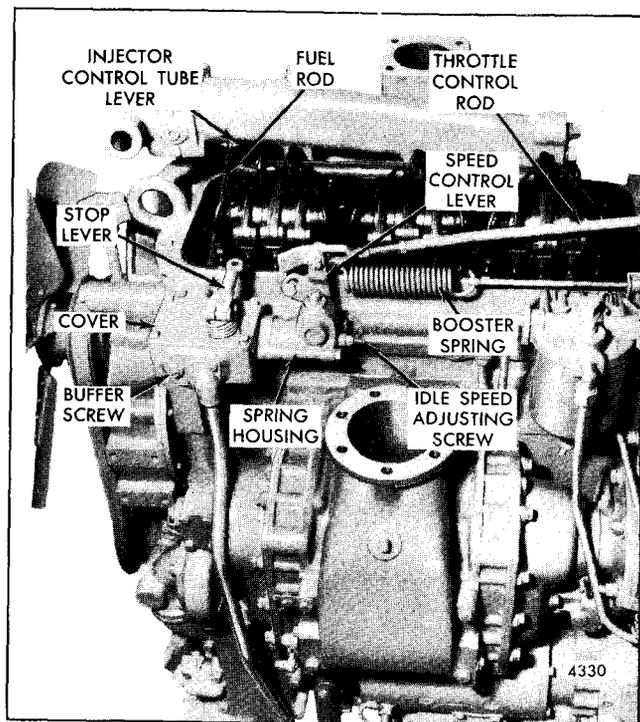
Buffer and Idle Speed Adjusting Screw
